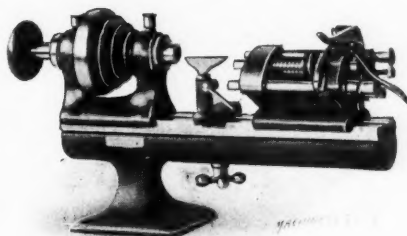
Precision Lathe with Three-spindle Tumble Tailstock
